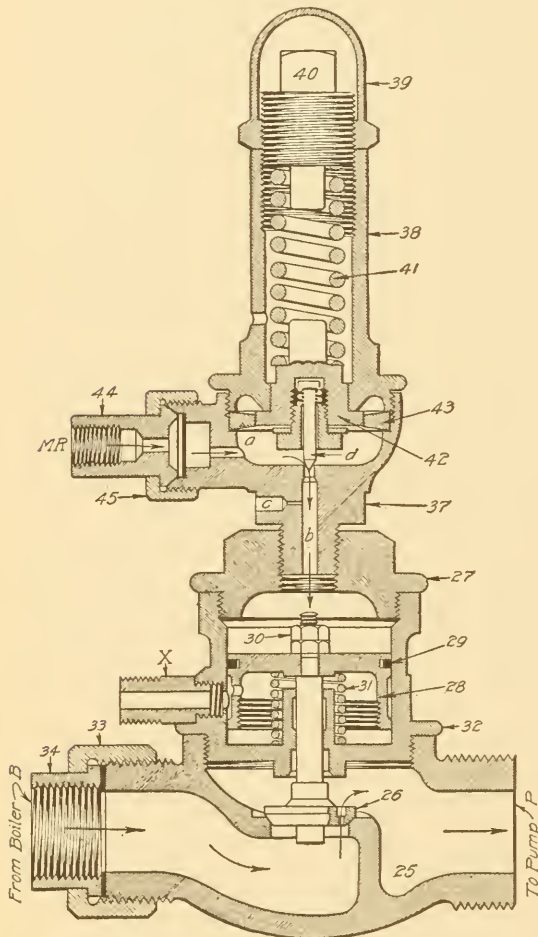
Westinghouse Type "S" Single-Top Steam Compressor Governor Closed
